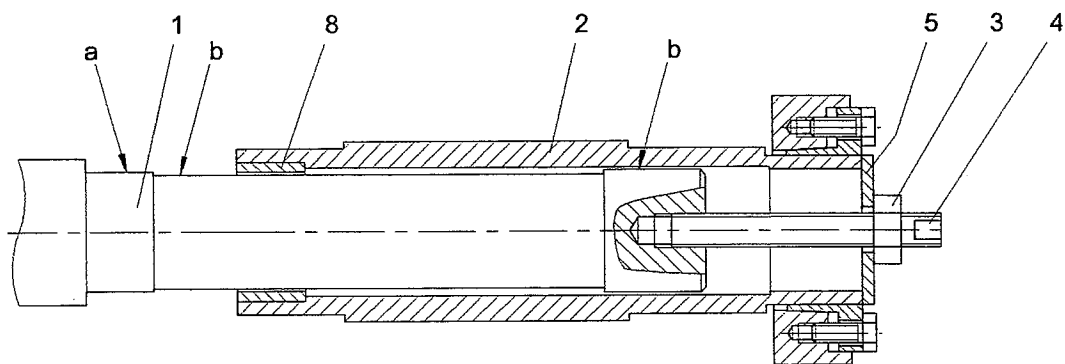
Mounting hollow shaft and shrink disk
